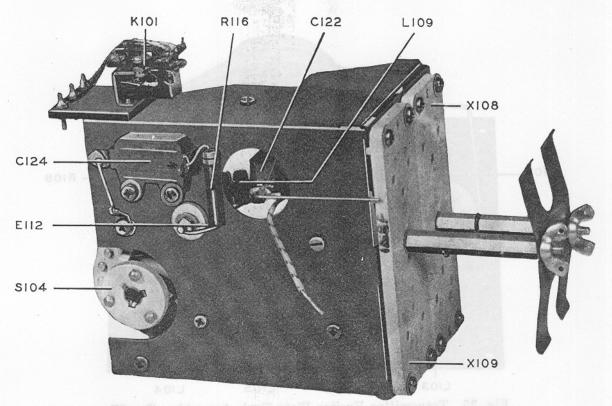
Transmitter Crystal Bracket Assembly—Top View
